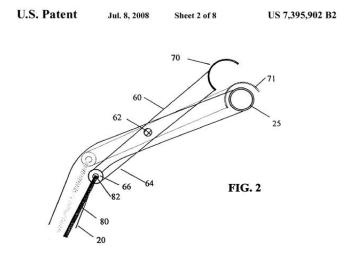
An illustration of the proposed hand locking system that will be incorporated in our final design. Here is the handle that will initiate movement of the waste tank. The user would apply a force at (70), lifting the linkage rod which is connected to the braking system. (D'Arca et al, 2008)
